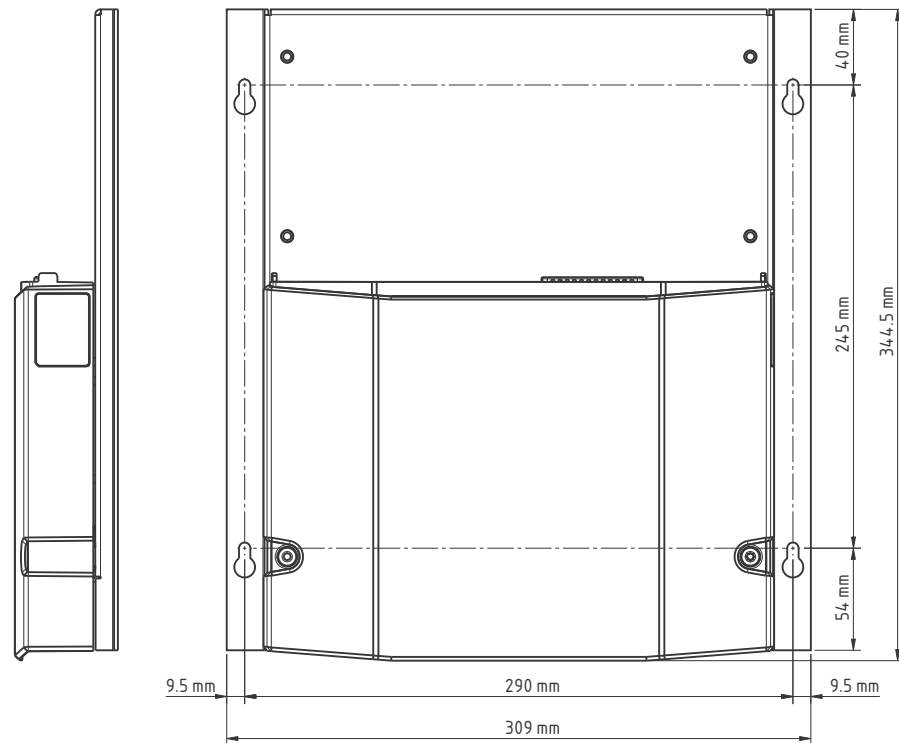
Installing the SAILOR 6283 AIS Connection Box and Wall Tray
